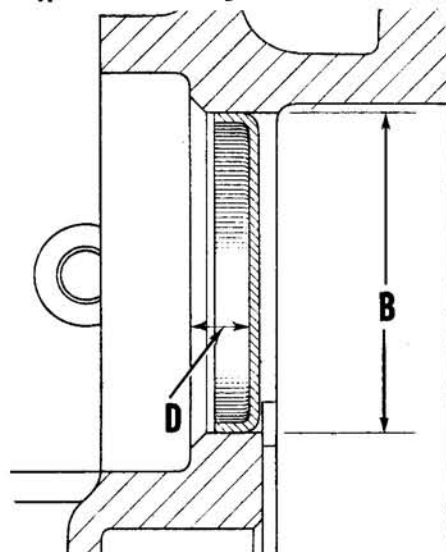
Measure bore (B) to determine proper size of plug; refer to text for sizes. Plug depth (D) measured from shoulder of bearing bore to front face of plug should be 0.53 inch.
